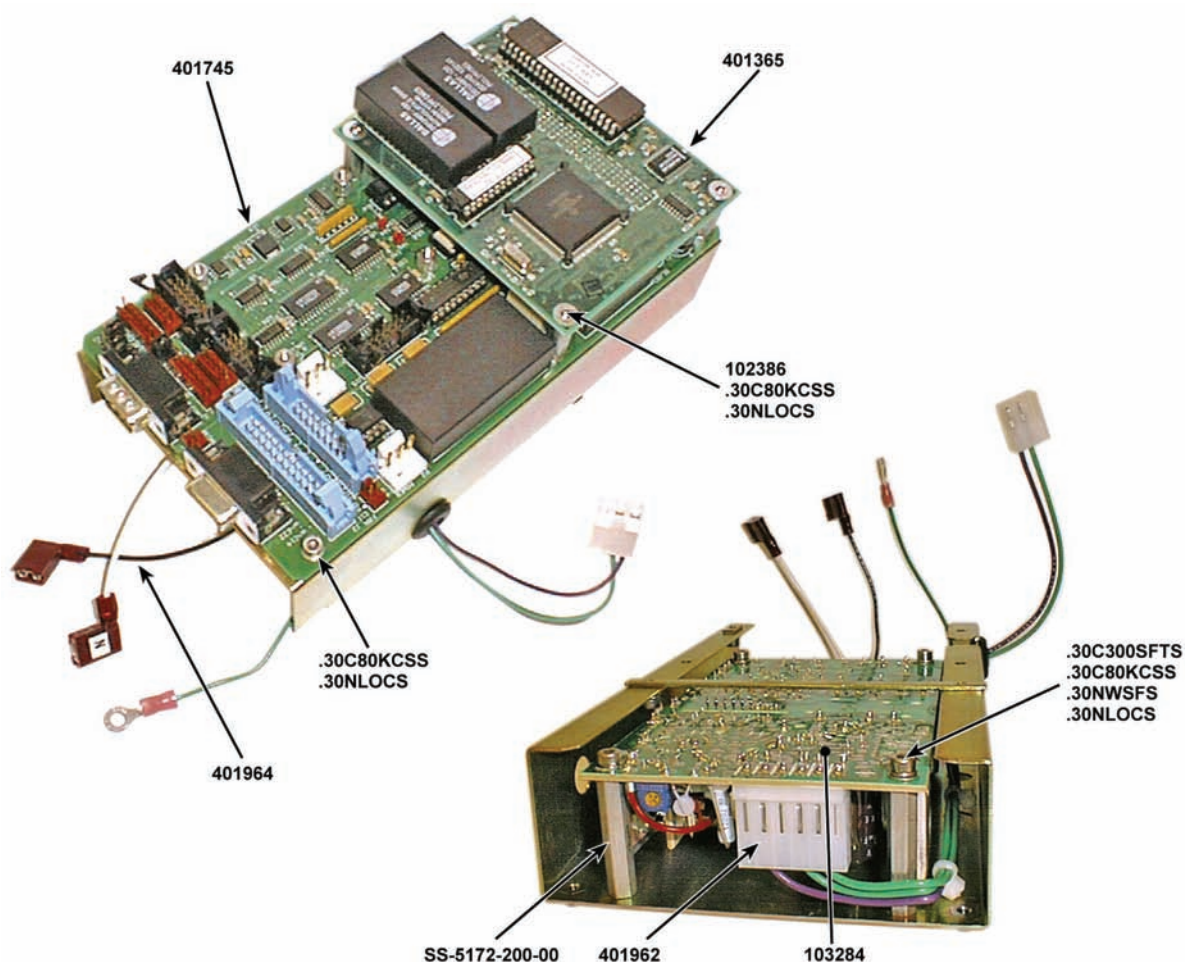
RPM4 Illustrated Parts Breakdown of Internal Assembly
